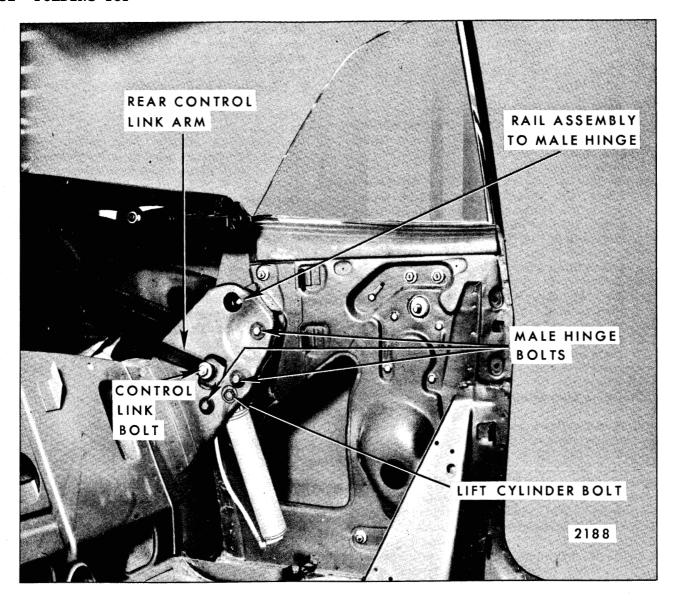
"A" Body Hydraulic Lift Cylinder Attachment
